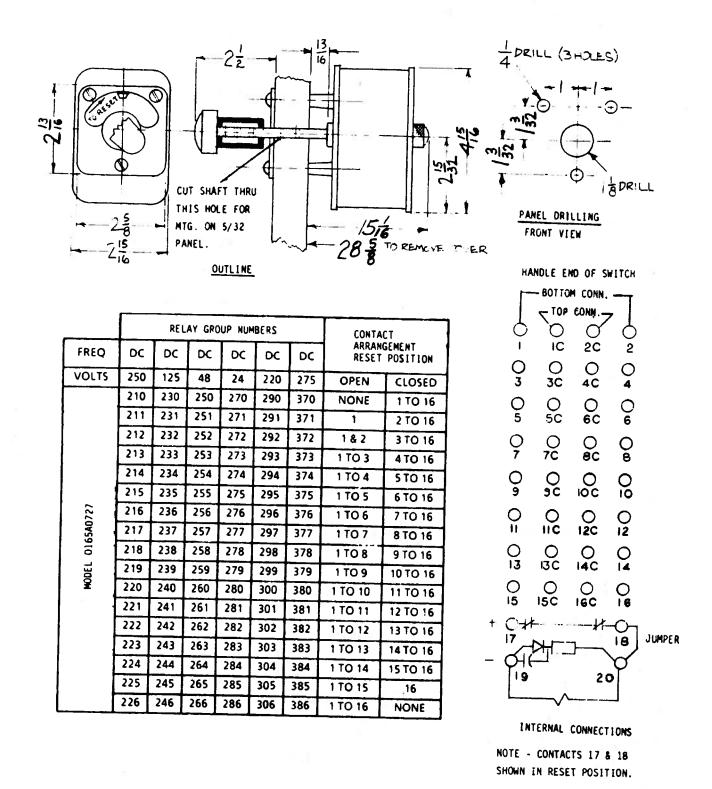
(0178A7113-4) Outline, Panel Drilling and Internal Connections for HEA62C Relay
